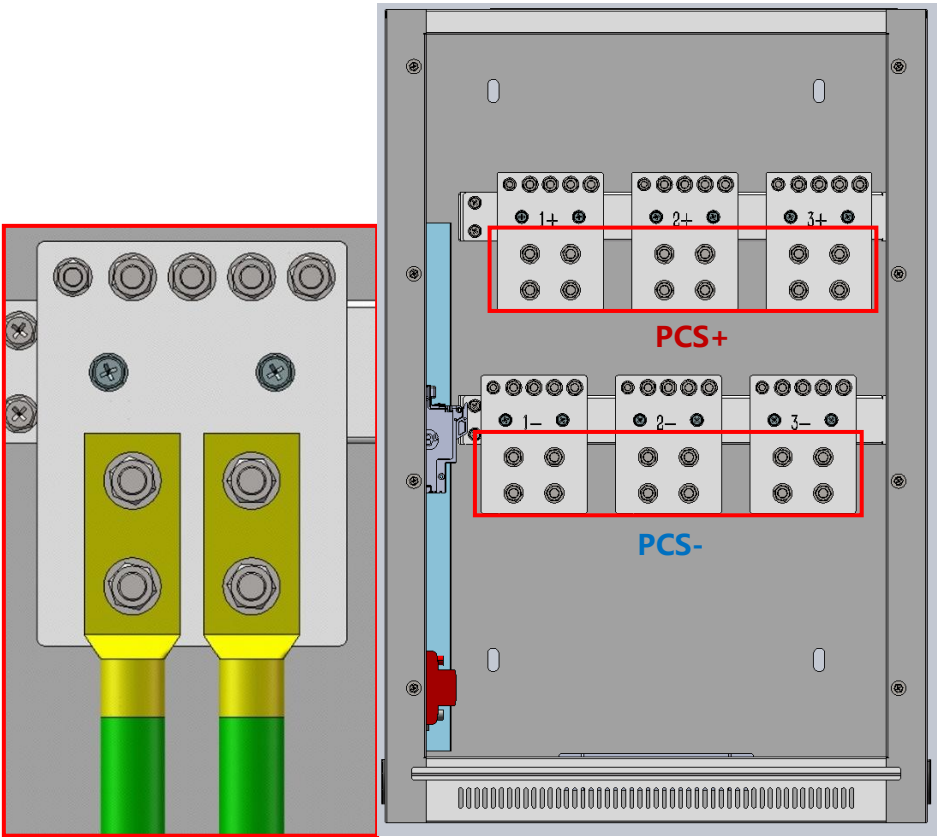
Connection Panel Copper Busbar Cable Connection
